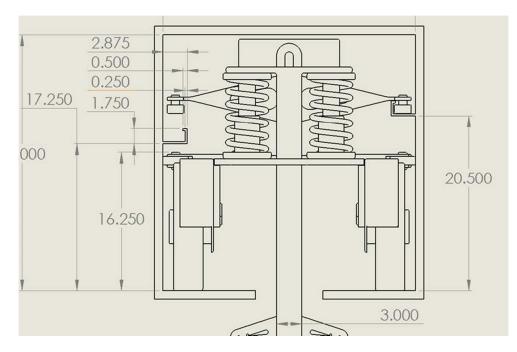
Guide way design preliminary concept. Switch mechanism is at required height to hook onto right groove, guiding bogie towards the right.
